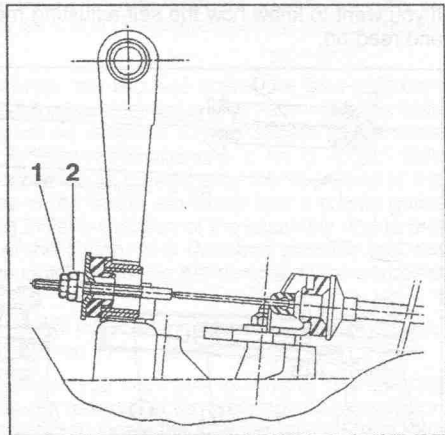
The adjusting nuts, i.e. locknut (1) and adjusting nut (2) are used to adjust the clutch pedal.
